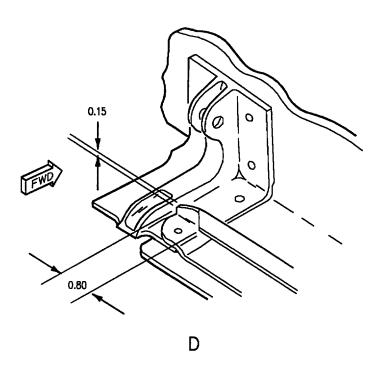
Trailing Edge Flap Support Assembly Repair (Sheet 2)
